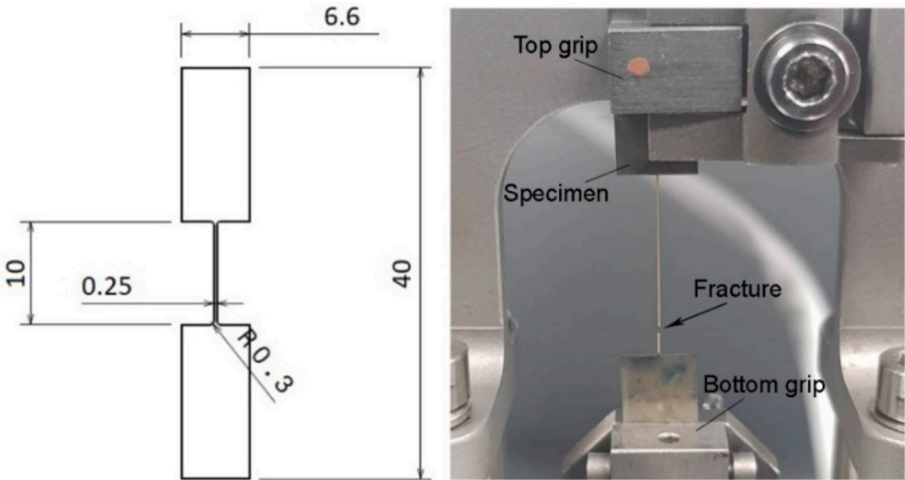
Geometry of the tensile test specimen geometry (left) and configuration in the testing machine (right), dimensions are in mm.
